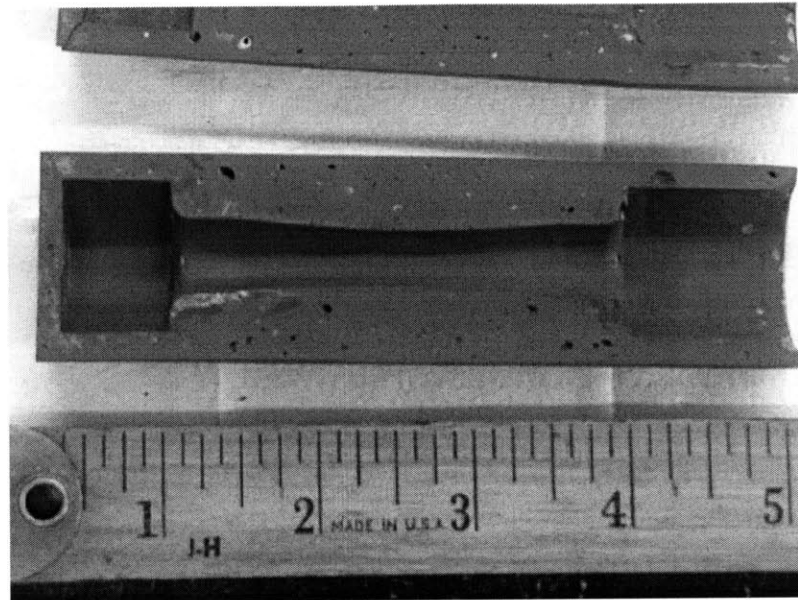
Photograph of one part of the tensile mold. The yard stick units are inches. 1 in=2.54 cm.
